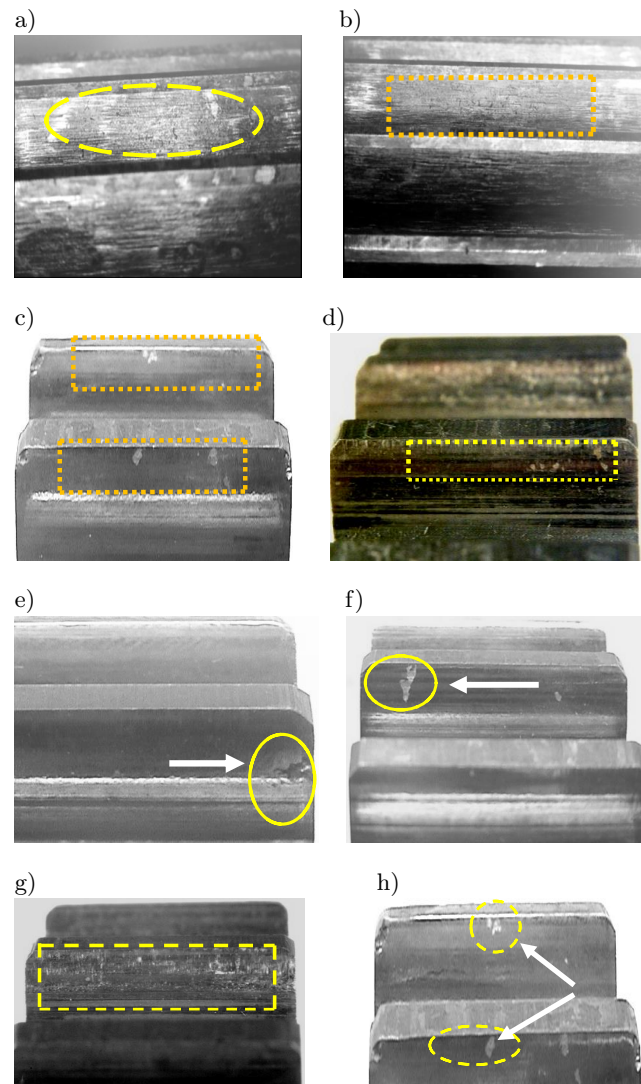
Surface fatigue wear developed on gear teeth contact under accelerated test conditions: a) initial micro pitting on dedendum after 20 h, b) increase in pit size (after 36 h), c) macro pitting (after 72 h), d) abrasive wear (after 108 h), e) progressive pitting on tooth (after 144 h), e) spalling (after 162 h), f) scuffing (after 198 h), g) increase in pit size (after 216 h).
